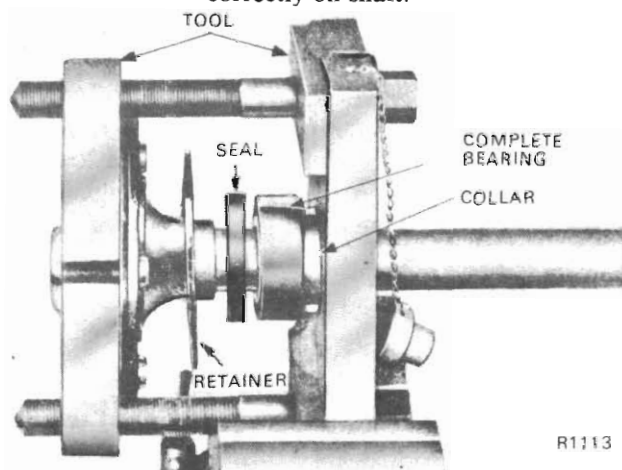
Installing axle shaft bearing and collar using Tool E3C20C.
